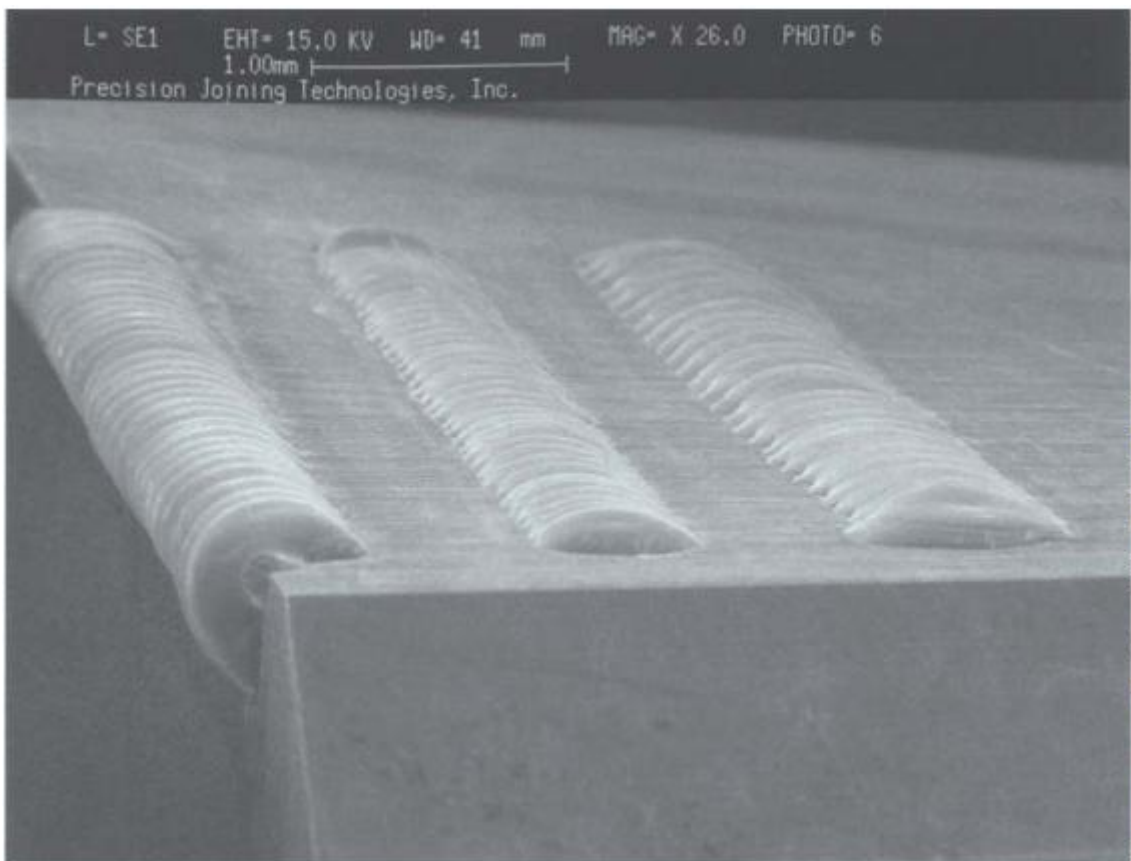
Photograph of typical laser weld build-up of 420 SS mold.
